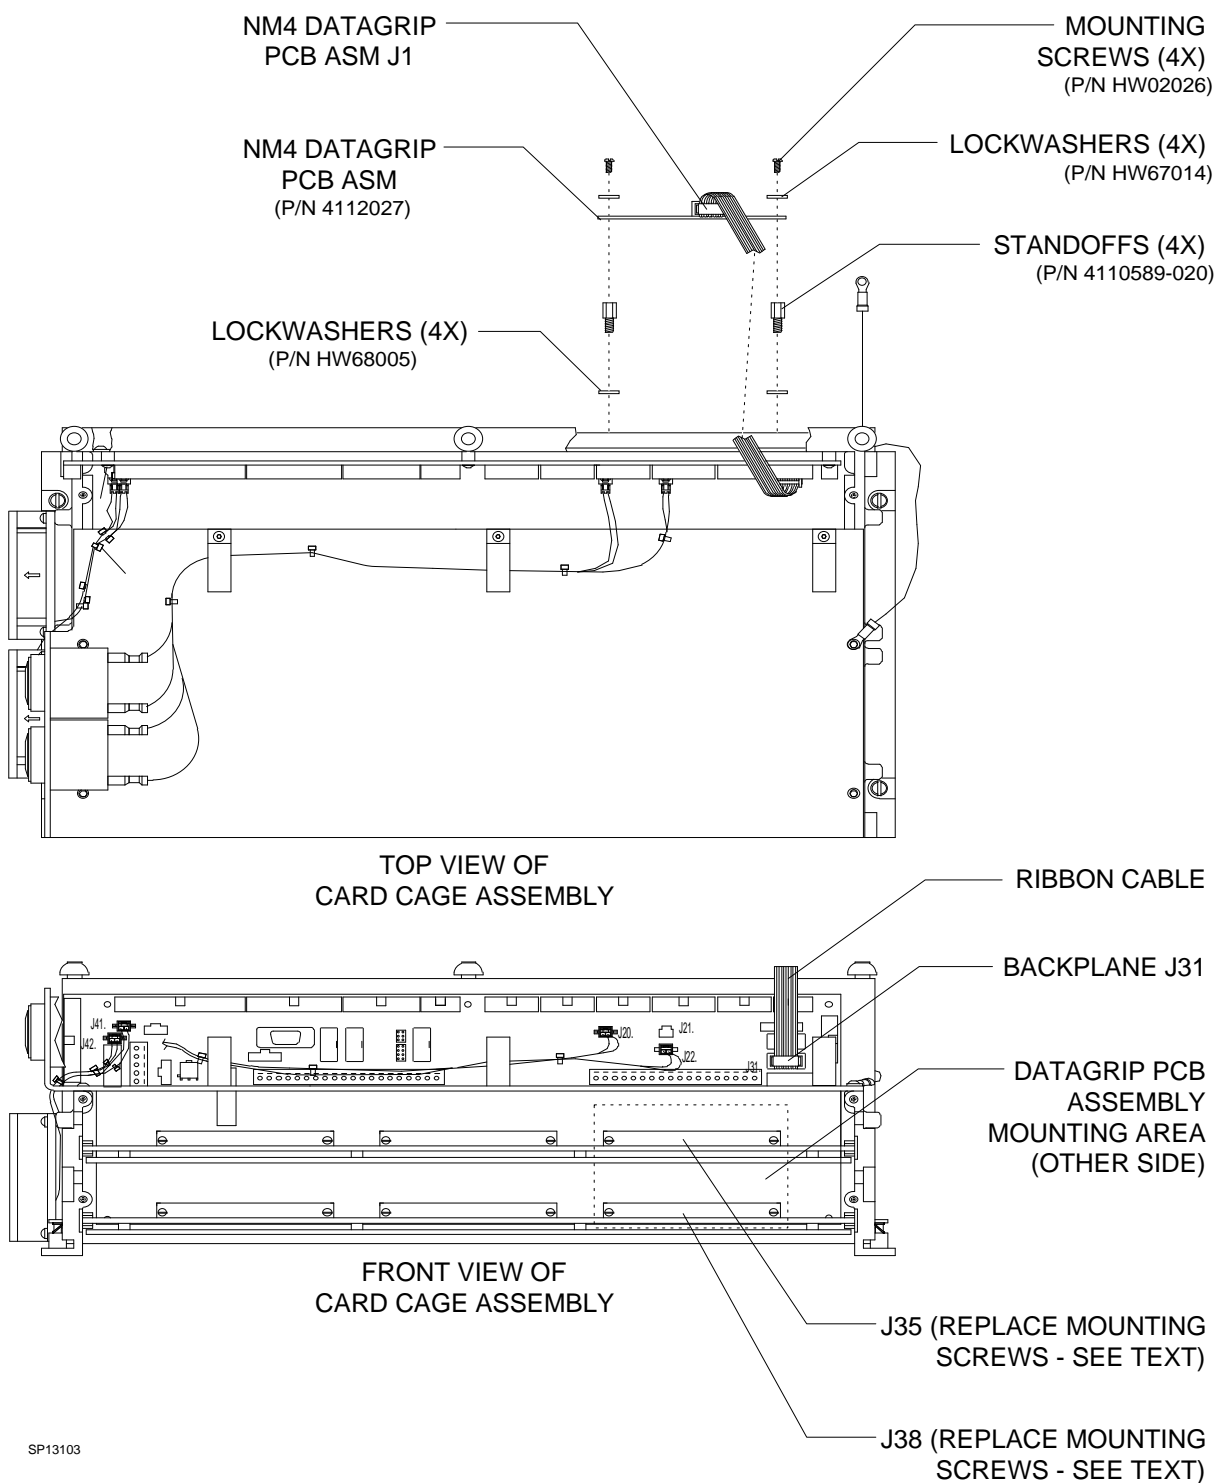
NM4 DATAGRIP PCB ASSEMBLY INSTALLATION
